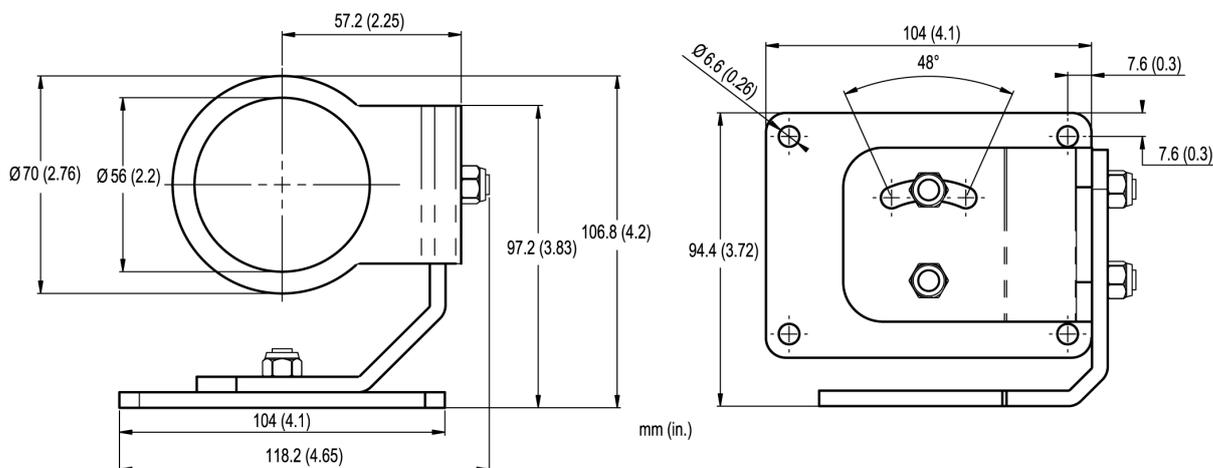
Adjustable Mounting Bracket (Stainless Steel) XXXMMACAB
